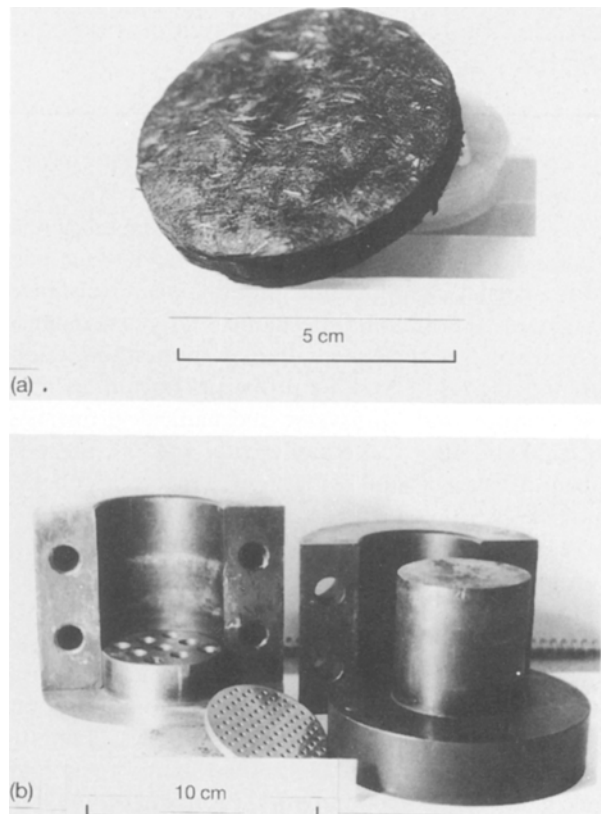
(a) A press-formed fibre preform, and (b) the mould used.
